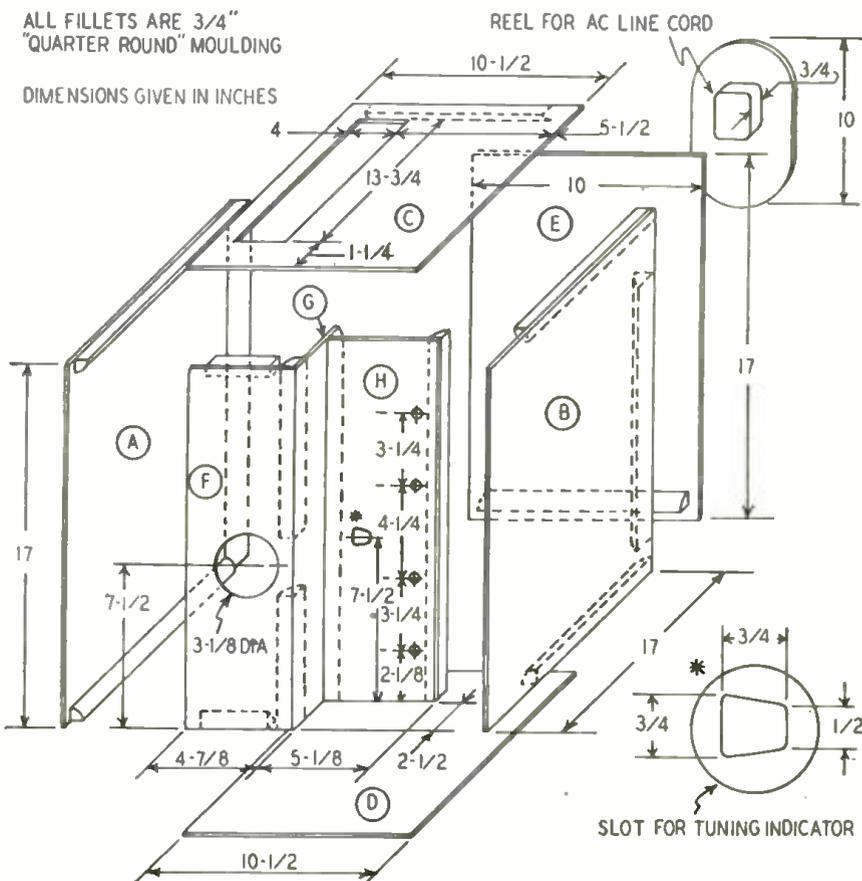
This completely dimensioned drawing may be used to duplicate case made by author.
